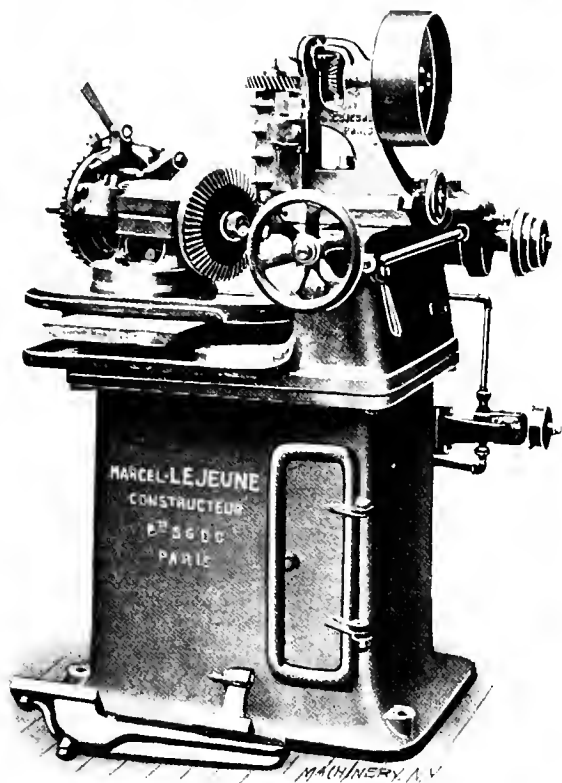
A Special Milling Machine for Cutting Bevel Gear Teeth.
